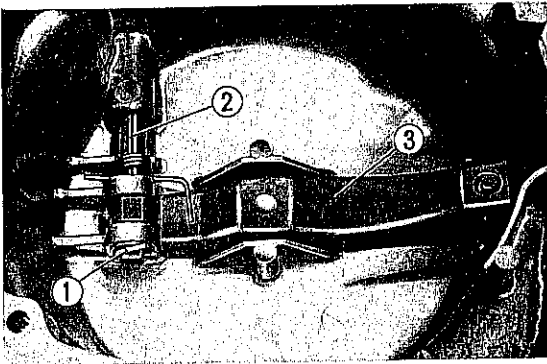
① Cotter pin ③ Clutch adjusting lever
